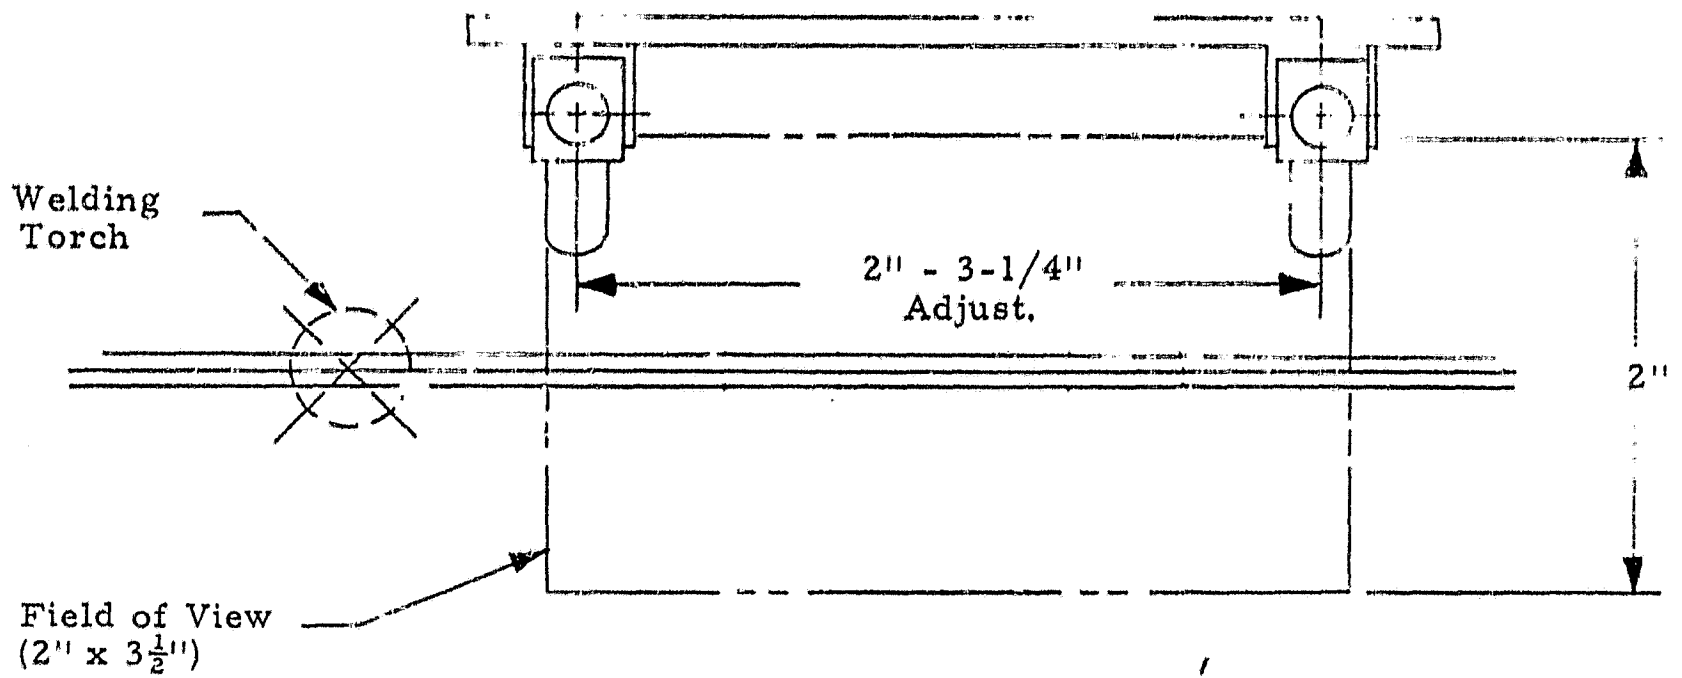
Welding Adapter Viewing Area
